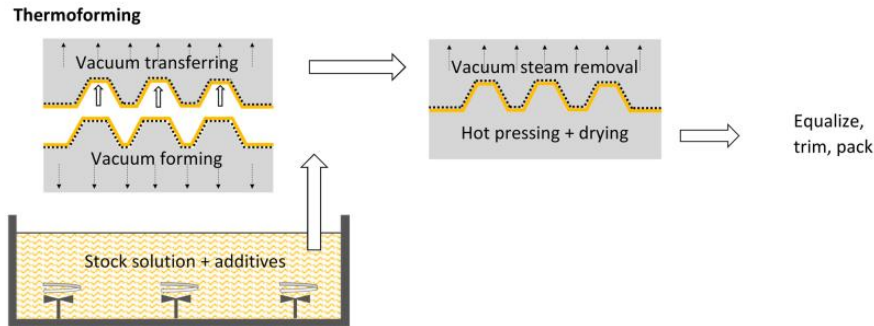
Thermoforming molding processing technique (Semple et al., 2022)
